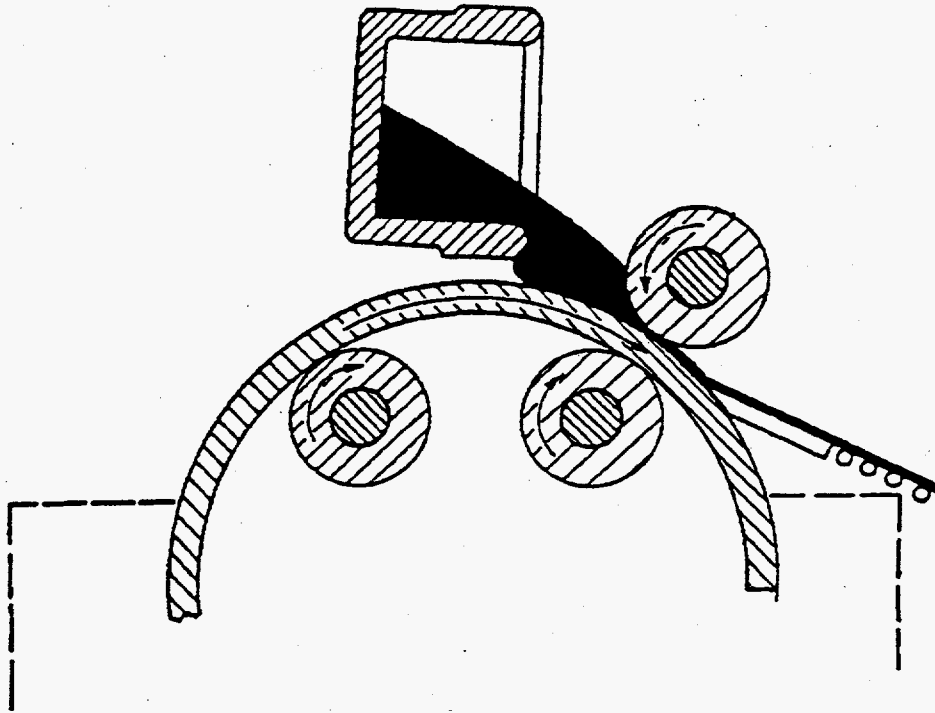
Ring Roll Rough Casting Machine (Engineered Materials Handbook 1991)
